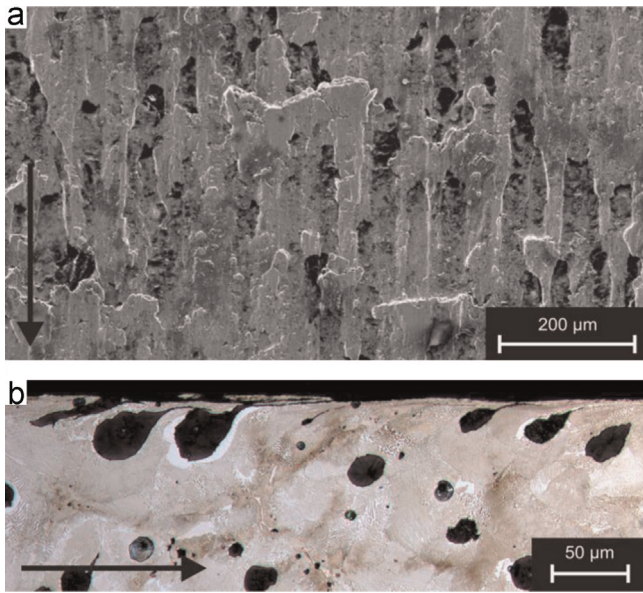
As-machined groove bottom of the unused roller sample. a) Secondary electron SEM image of the surface. b) Cross-section by light optical microscopy, in parallel with the cutting direction of the machining tool. The cutting direction of the machining tool is indicated by the arrows.
